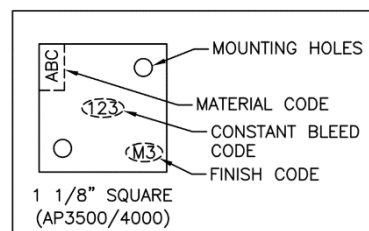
AP Tech 1.125 inch valve body engravings used on 3 and 4 series valves.
